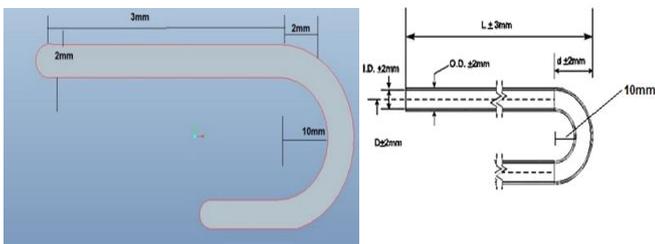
The Pro e model and drawing of the aluminum made die for rework of RAF.
